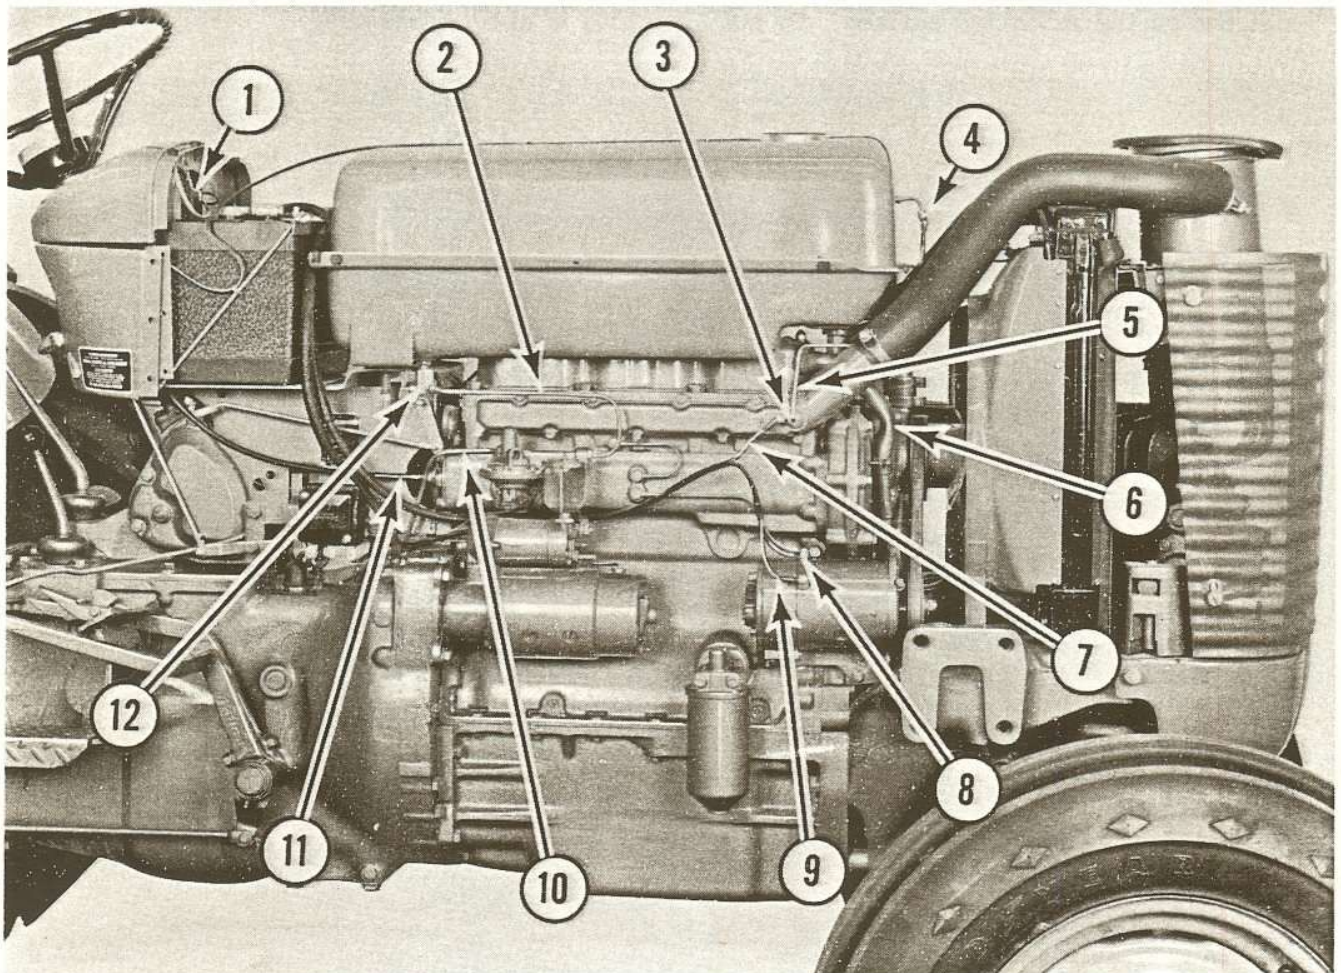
AD4.203 Engine Installation in MF 65 Tractor - Identification of Parts
